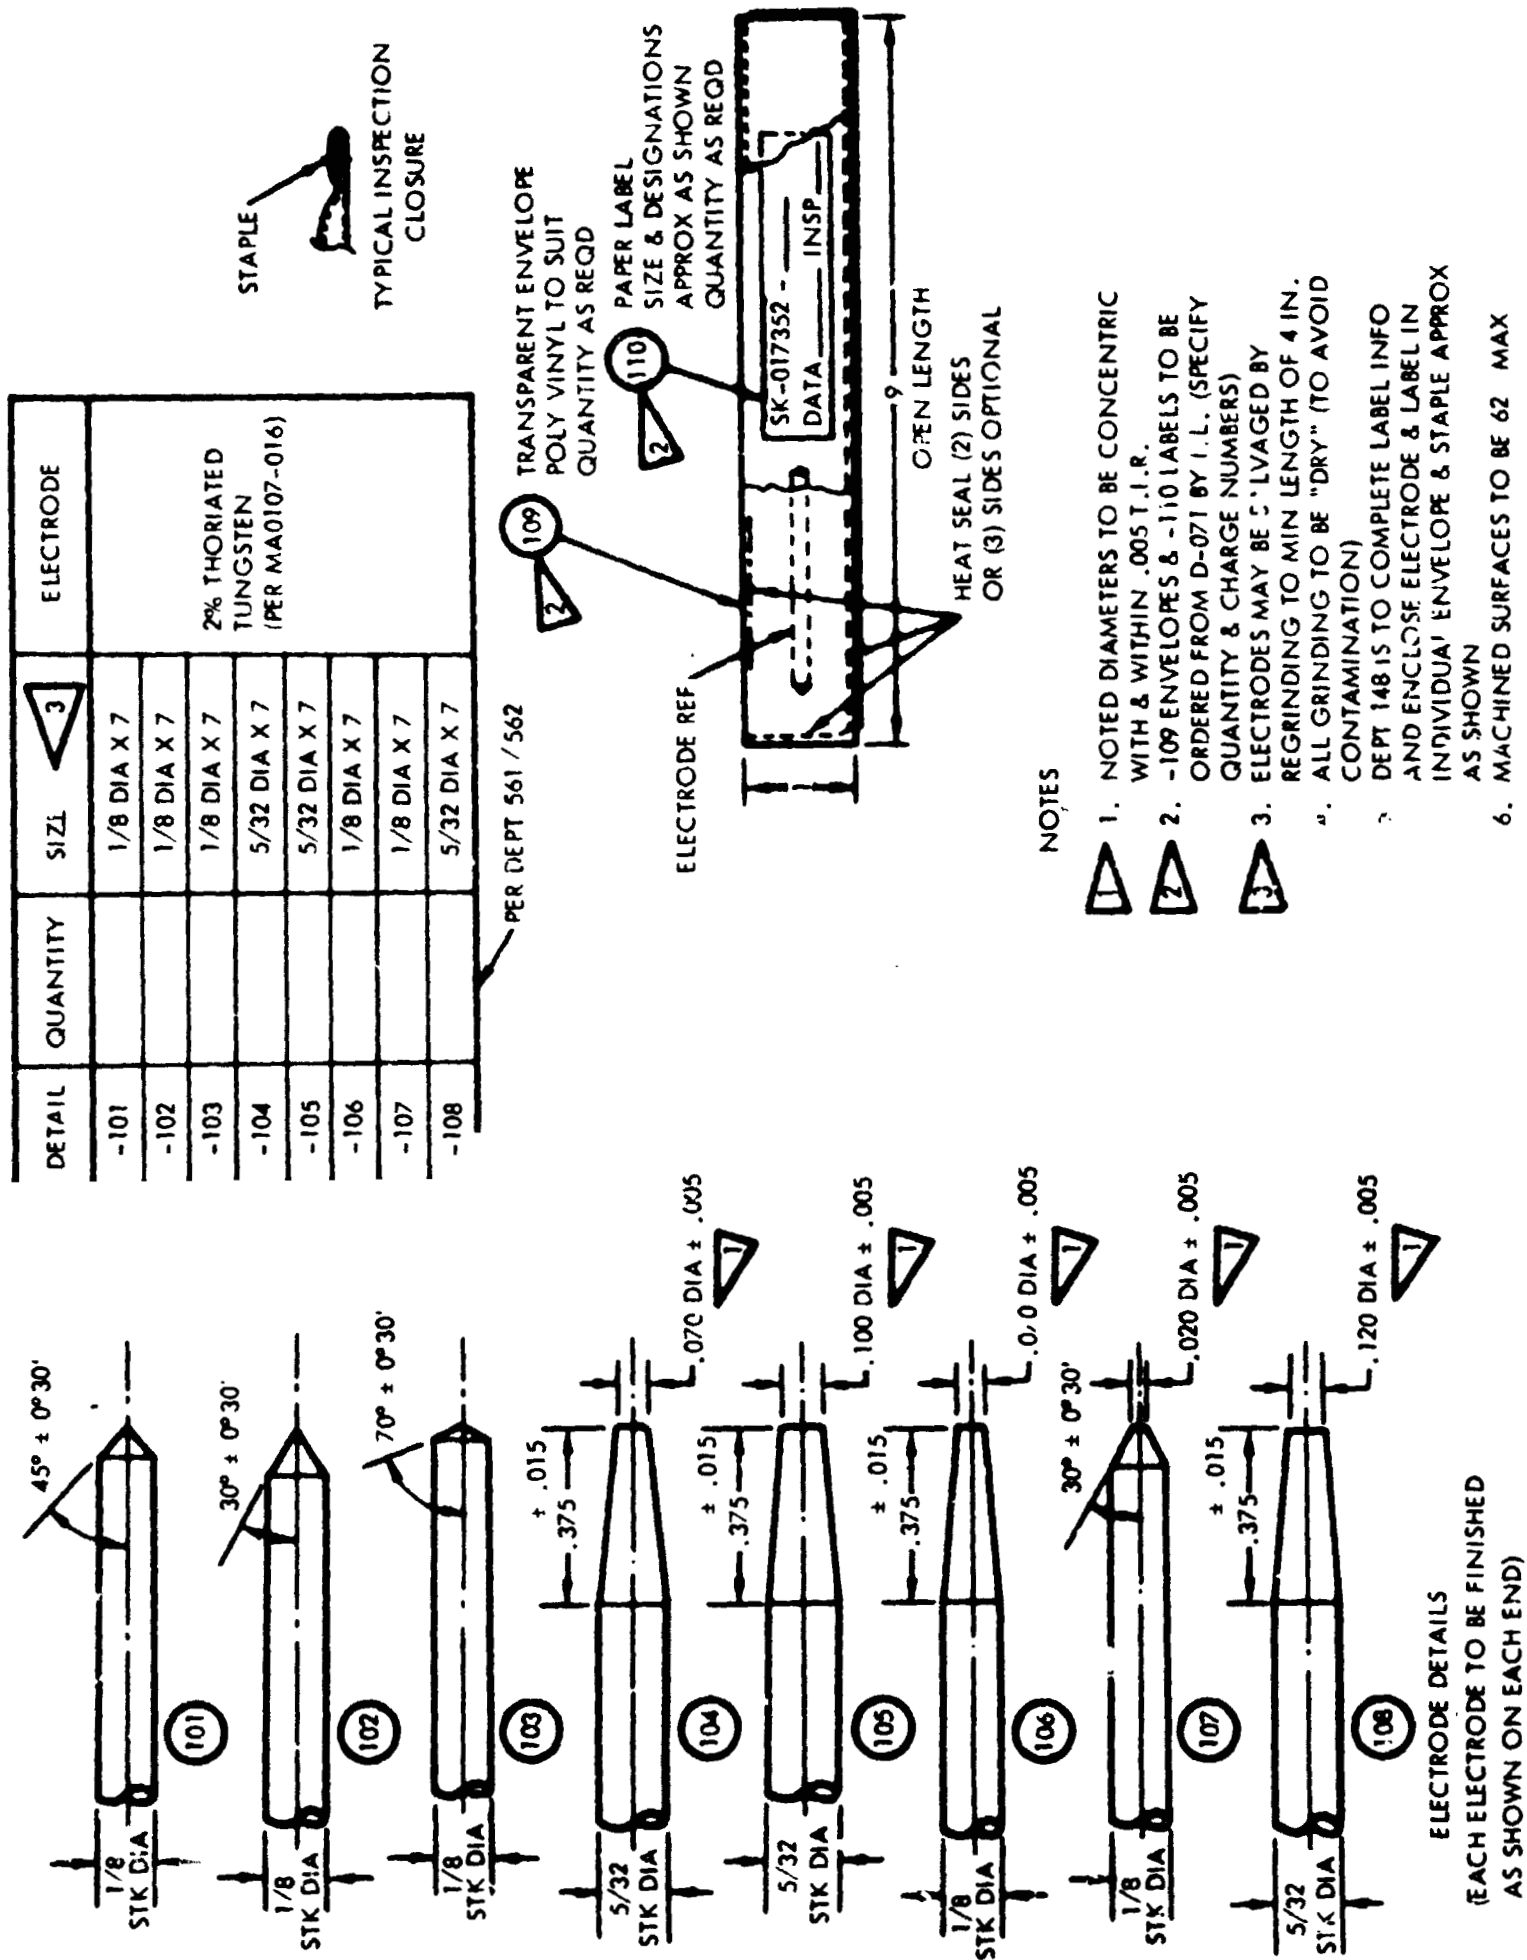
Saturn S-II Welding Electrode Configurations
